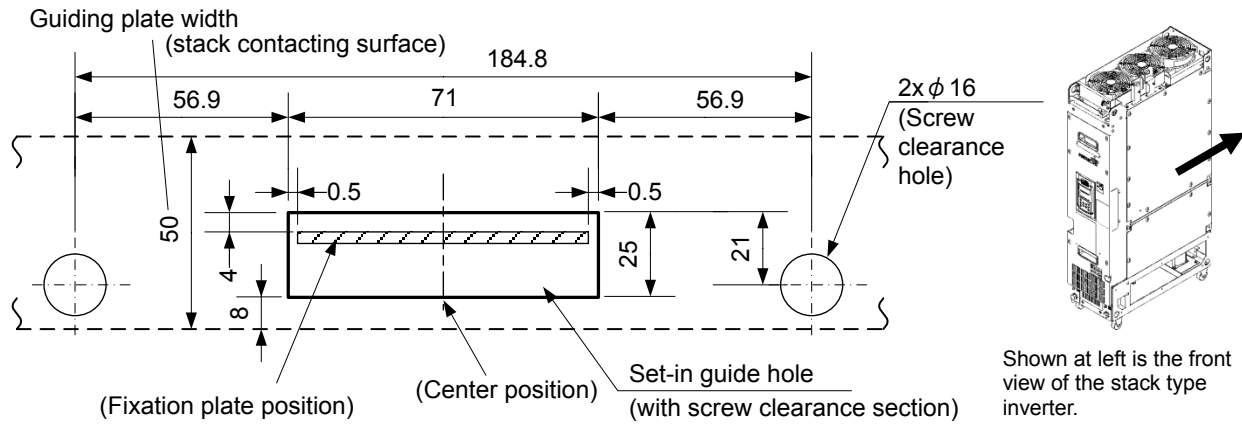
Positions of the set-in guide hole for the back face lower fixation plate and the screw clearance hole for stack type inverters
